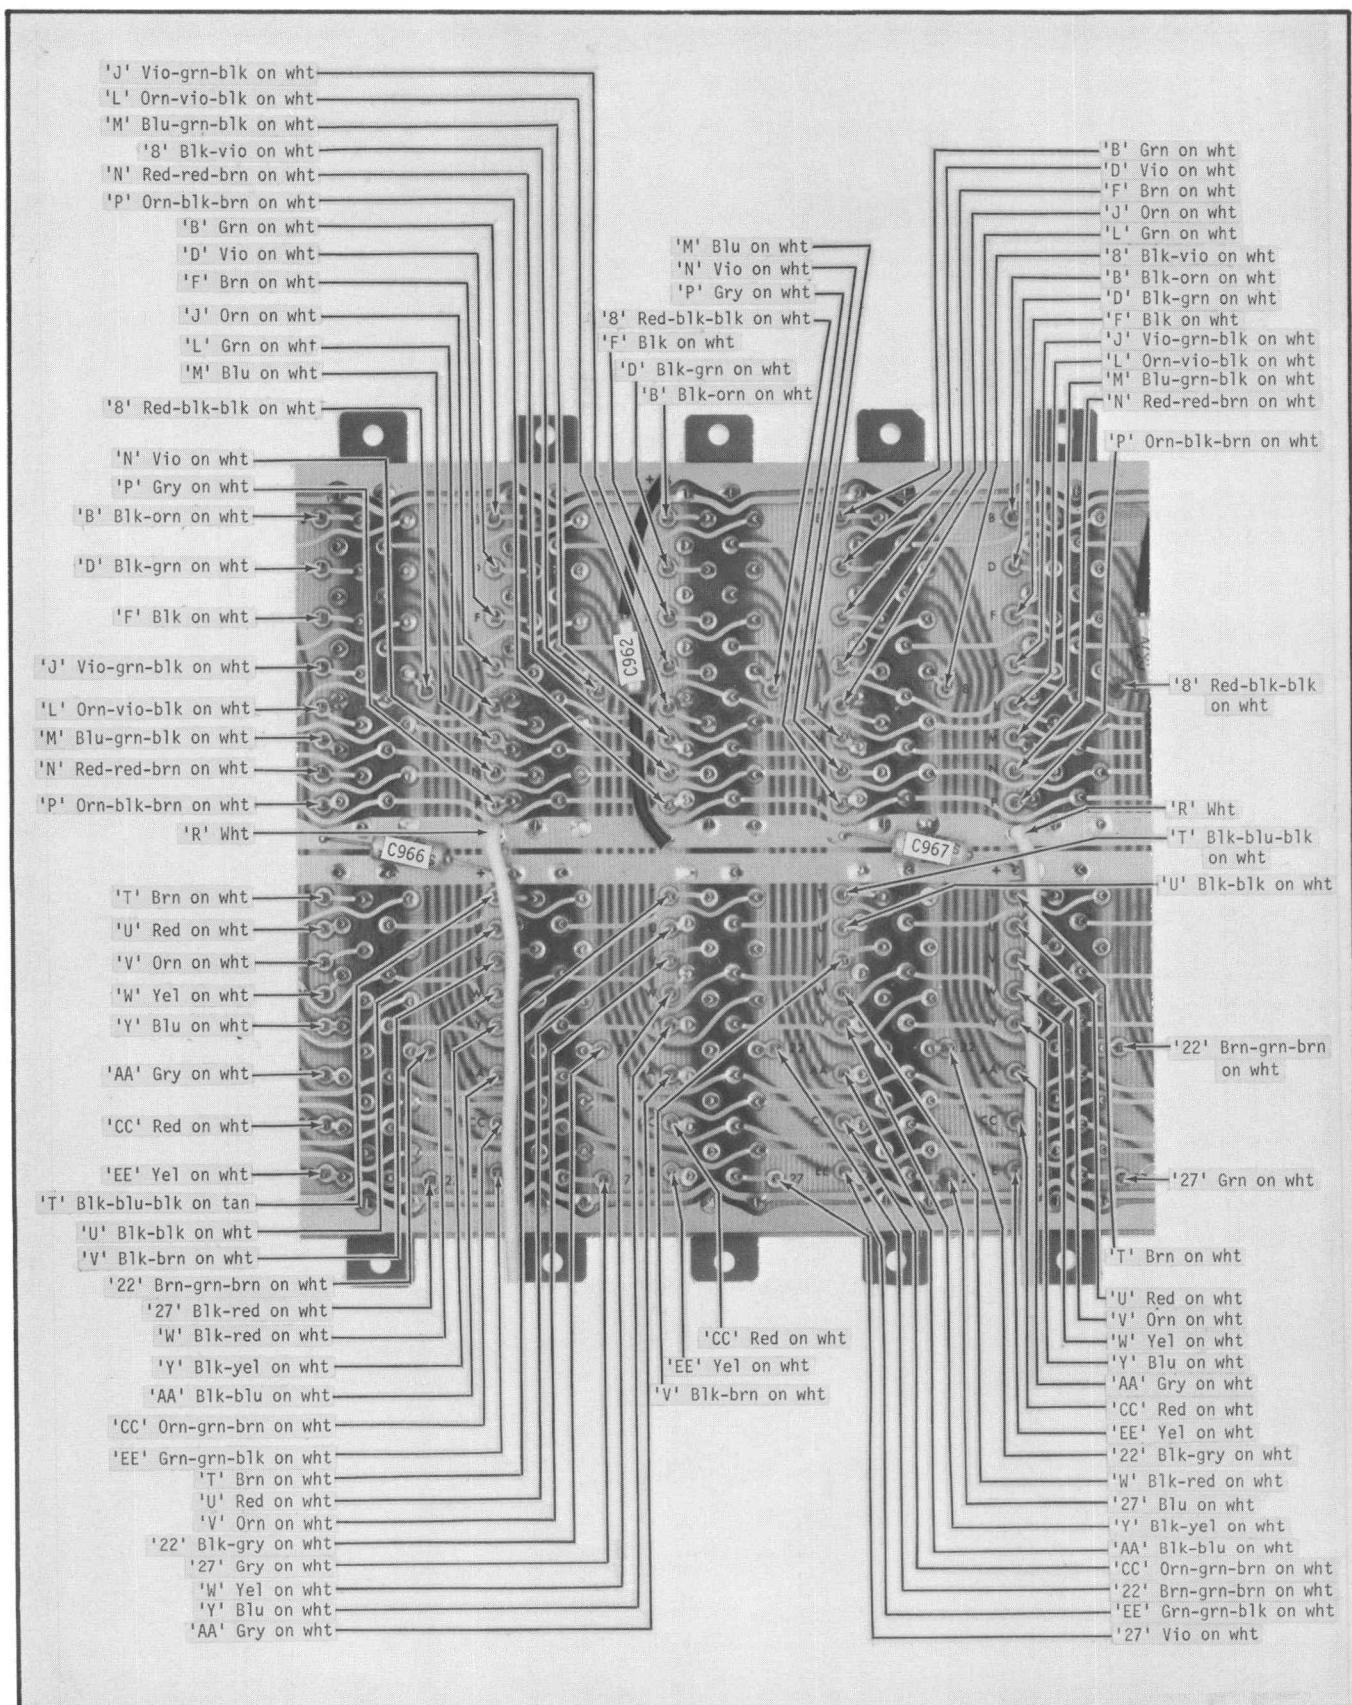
Partial interconnector circuit board showing component location and wiring color codes.
